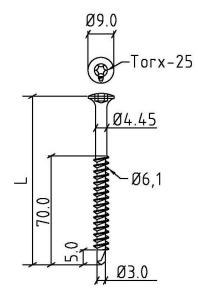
BS 6.1 Screw for fixing in steel sheets
